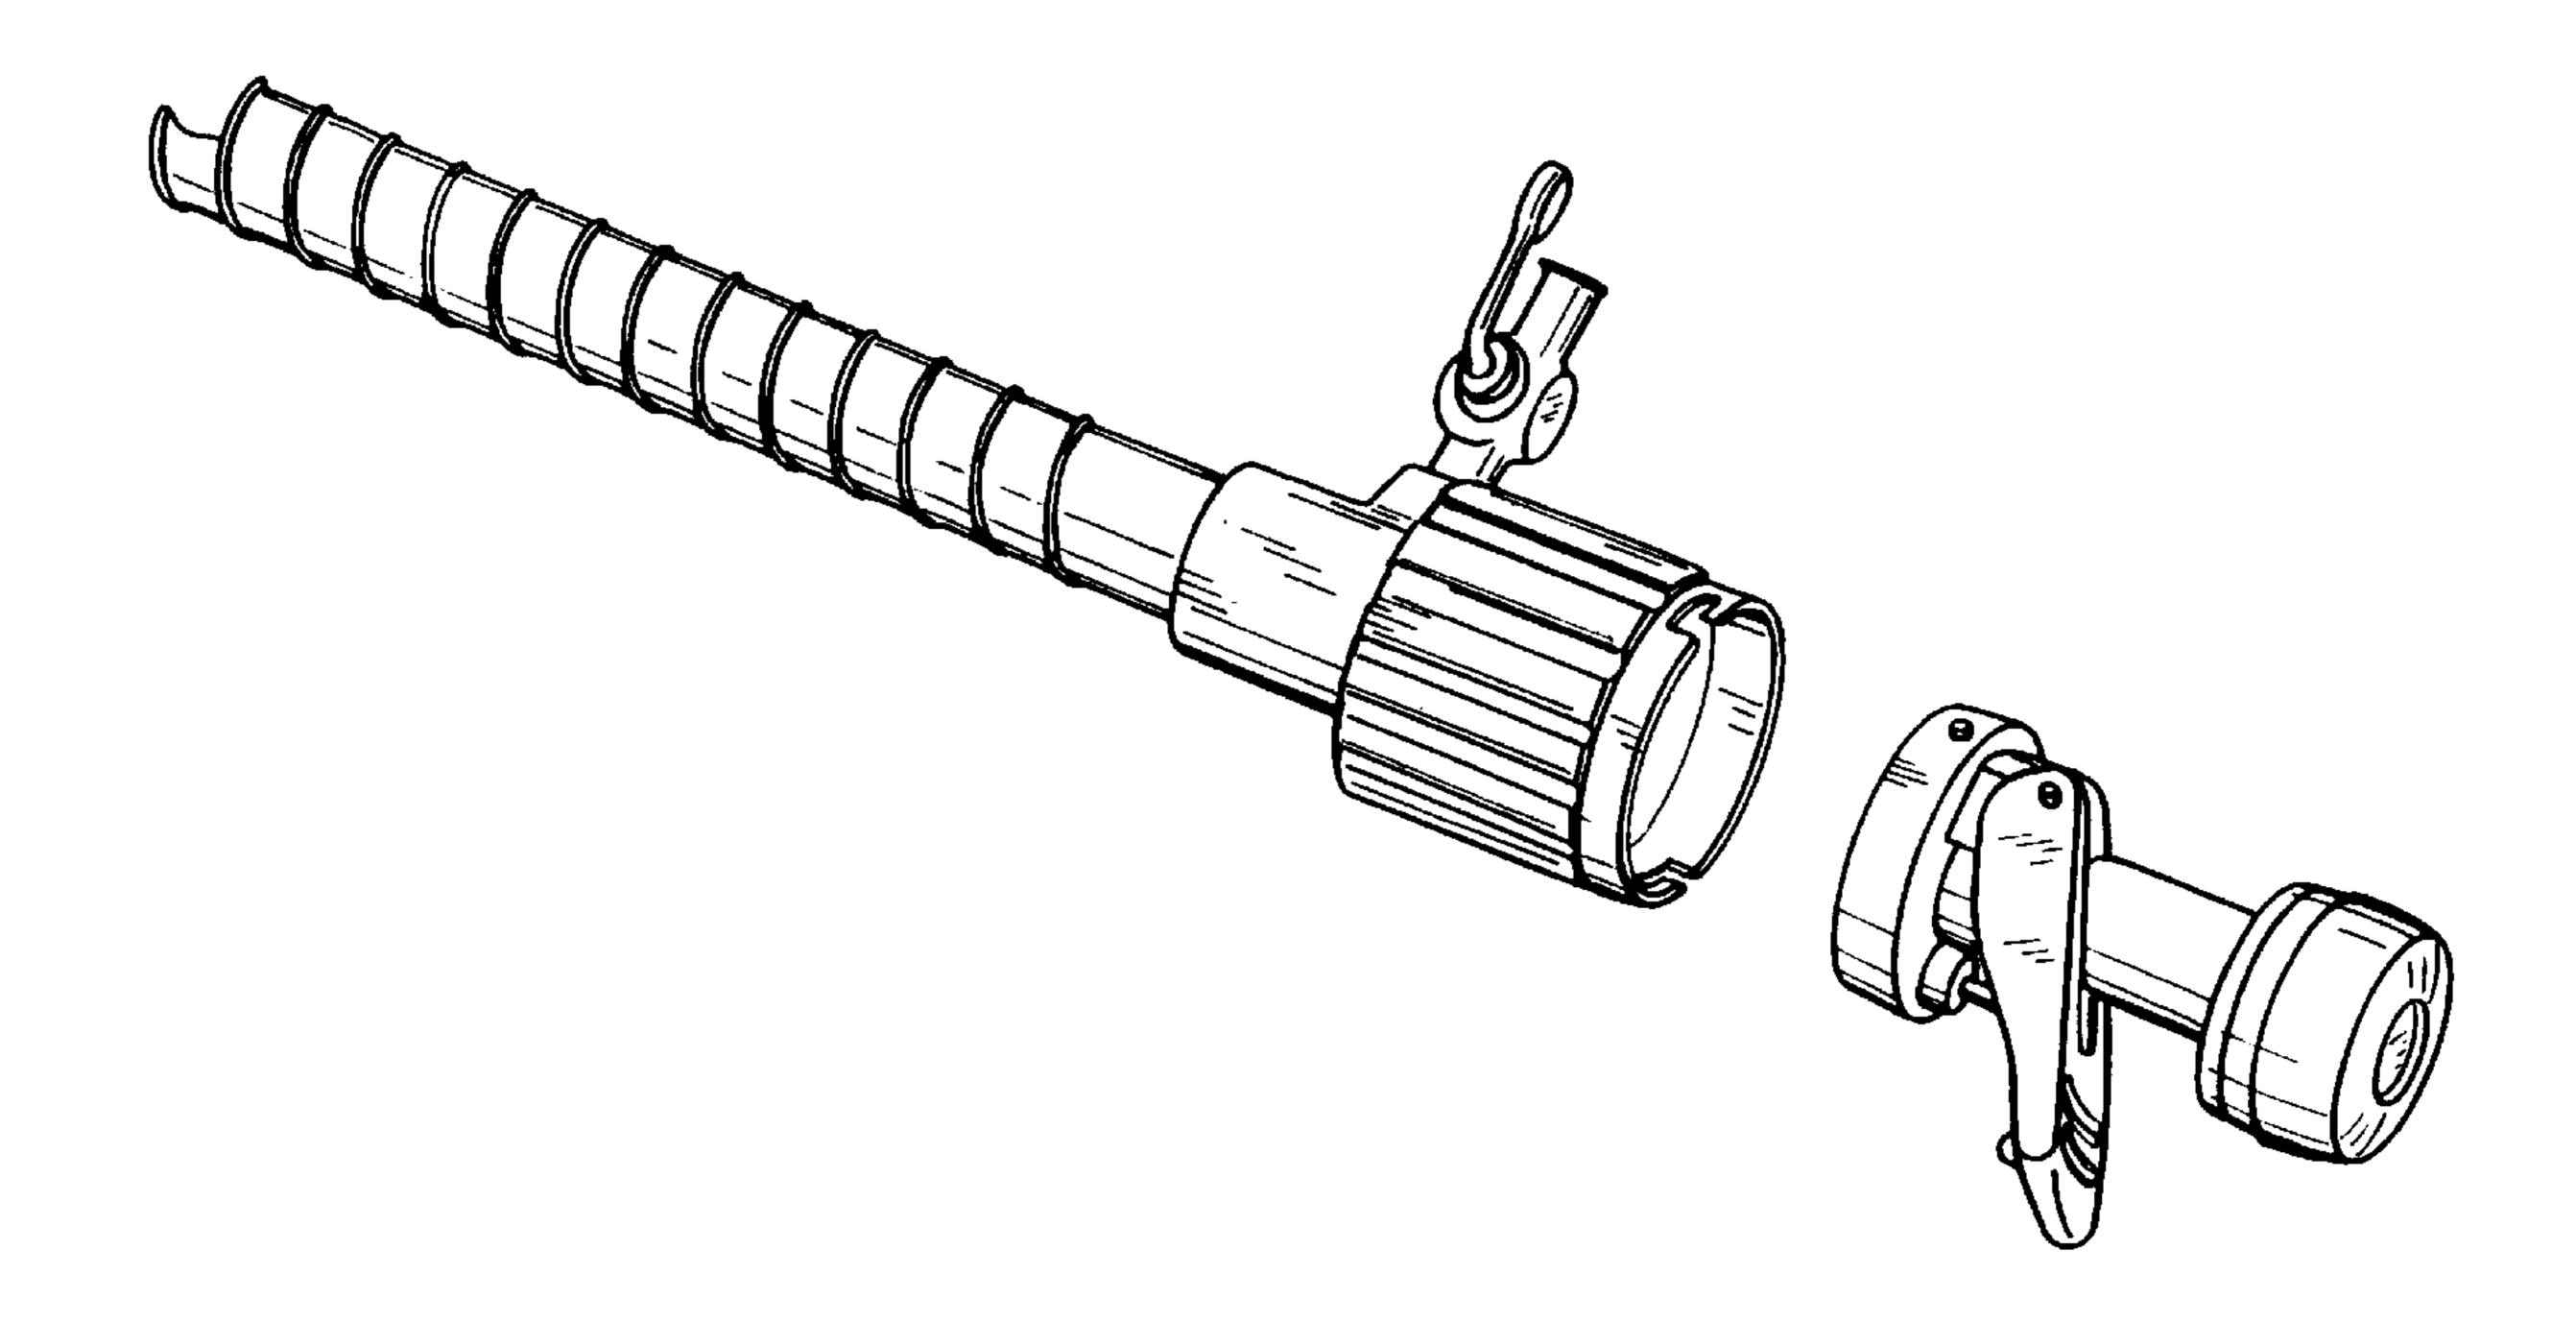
is a perspective left side exploded view of said trocar with the cap member detached from the trocar valve housing;
